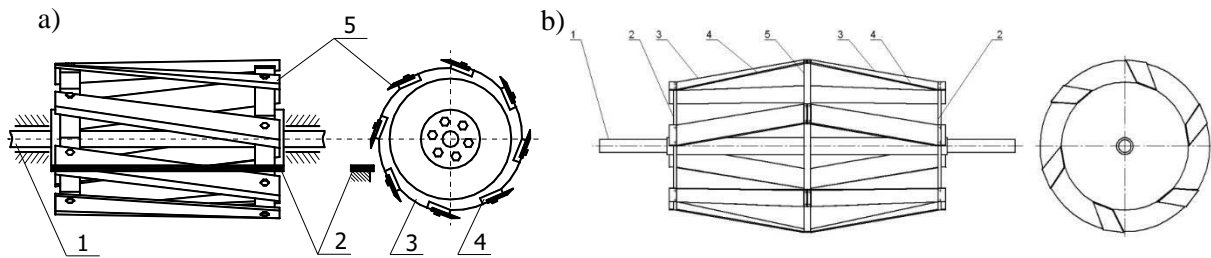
Cutting drum of a forage harvester [Bochat, 2010]: 1 - cutting drum shaft, 2 - counter cutting edge, called nib, 3 - cutting drum disc, 4 - knife vice, 5 - cutting knife
